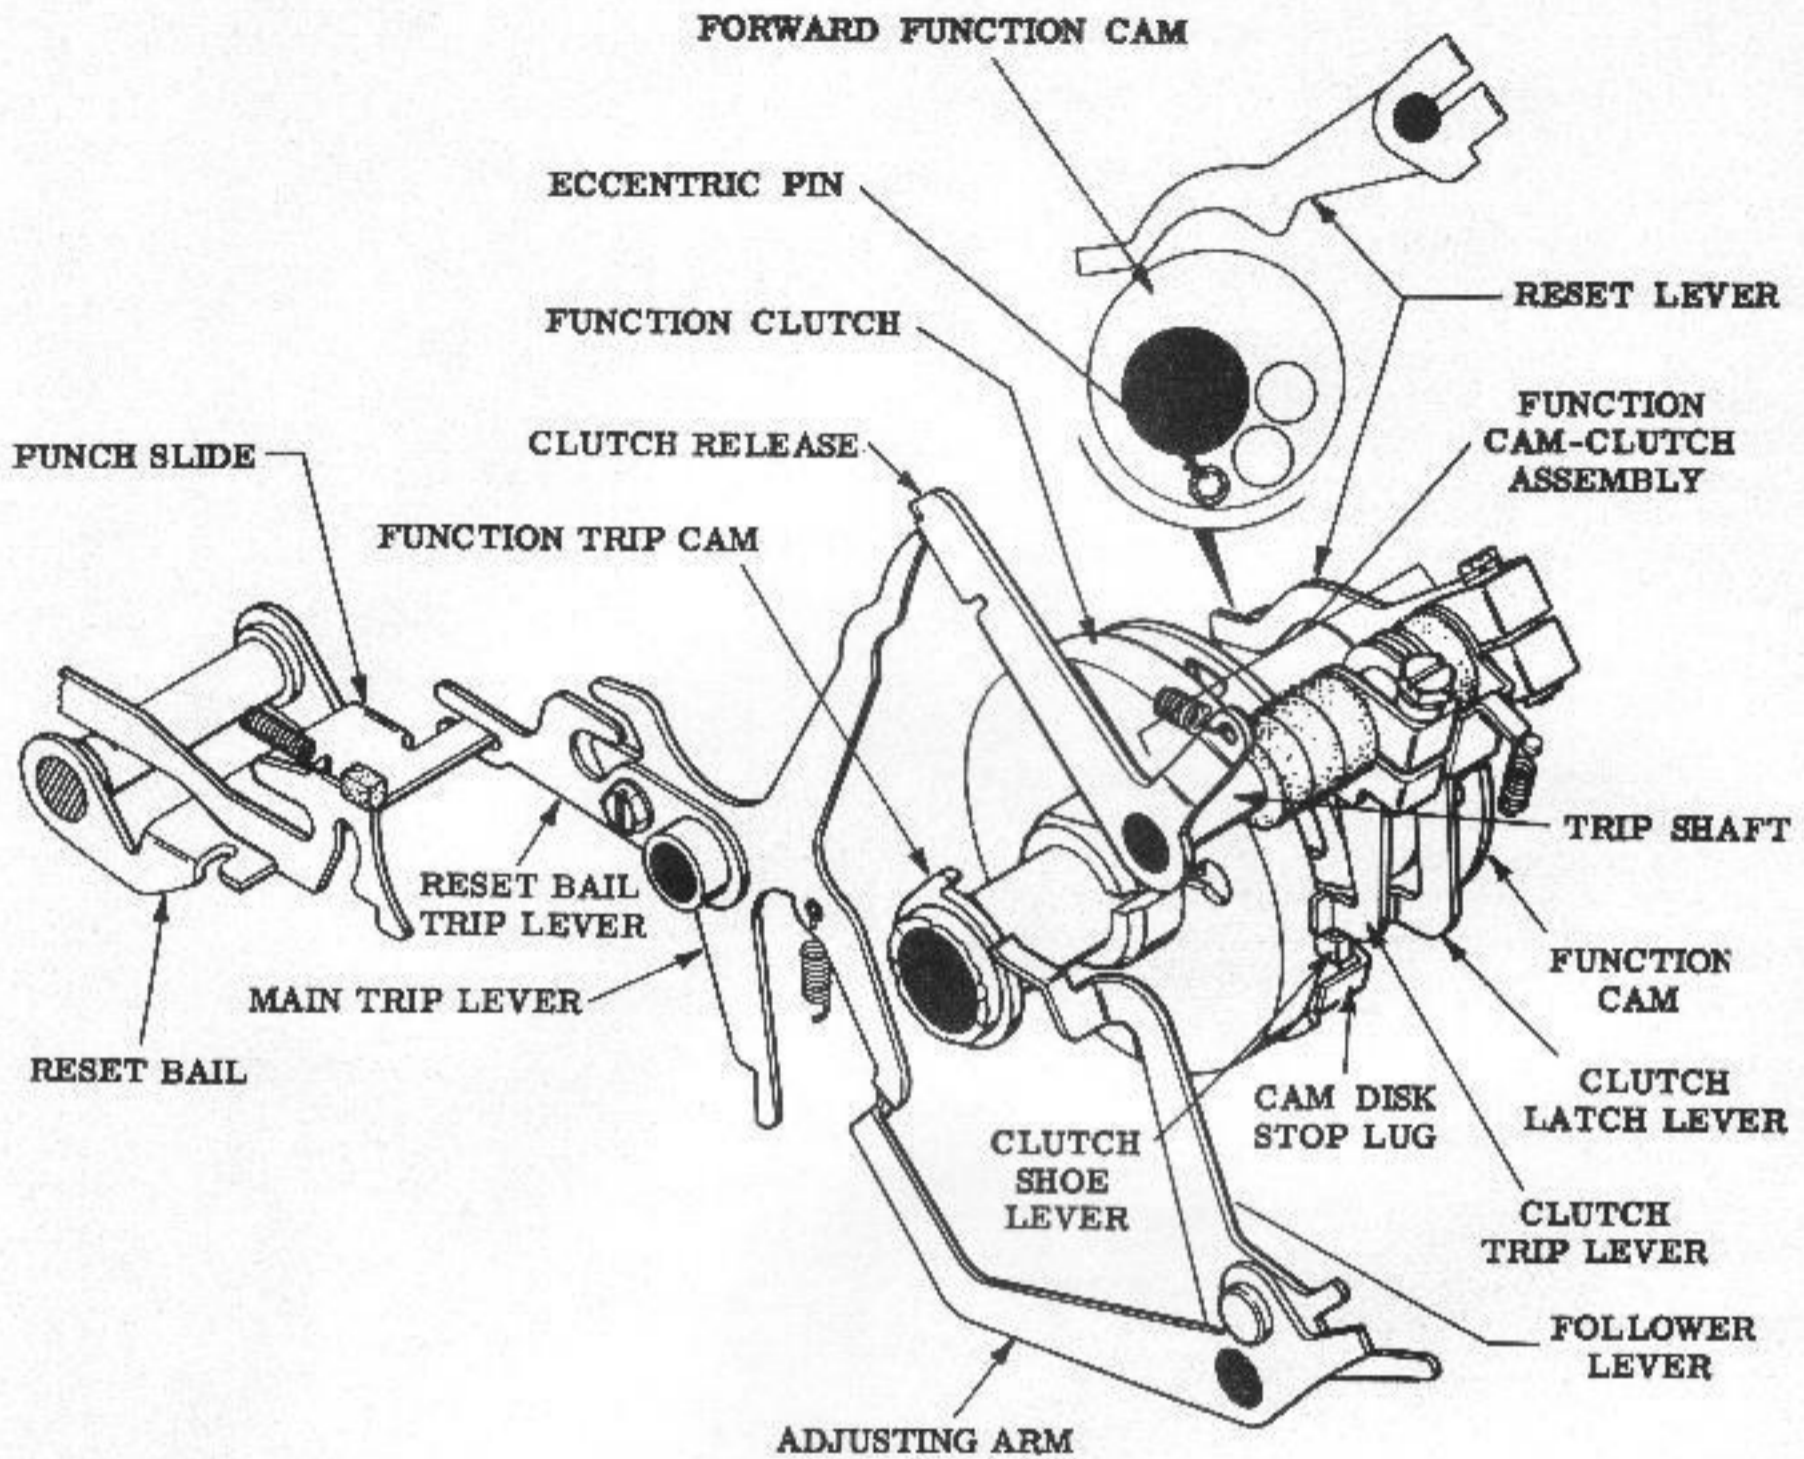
Function Cam-Clutch and Clutch Trip Assembly
